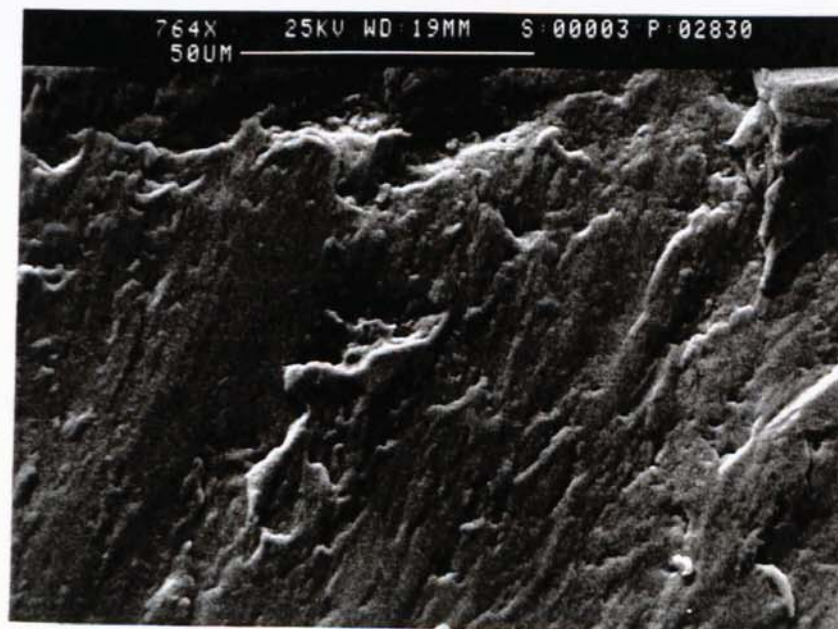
shows the flank face of BT42 HSS at the cutting speed of 20 m/min. The wear mechanism appears to be adhesive wear.
